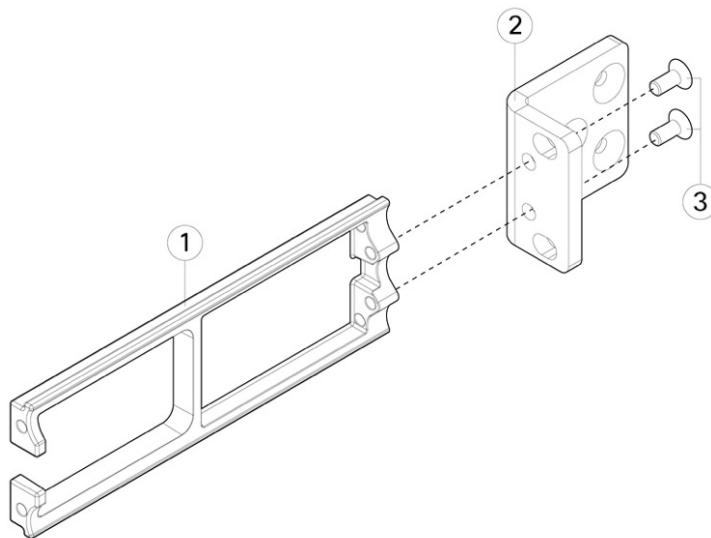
Attach the Rack-Mount Bracket to the Side of the Chassis
